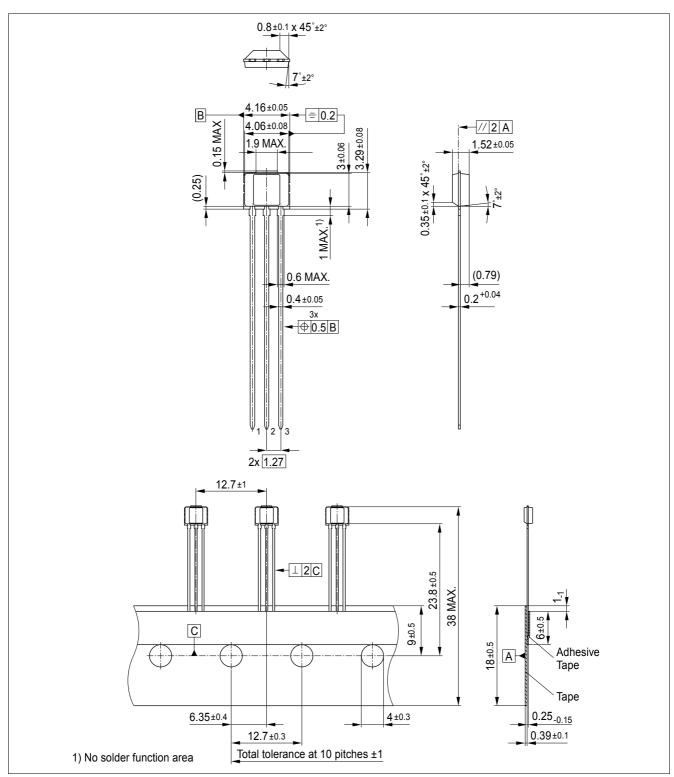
PG-SSO-3-2 Package Outline (All Dimensions in mm)
